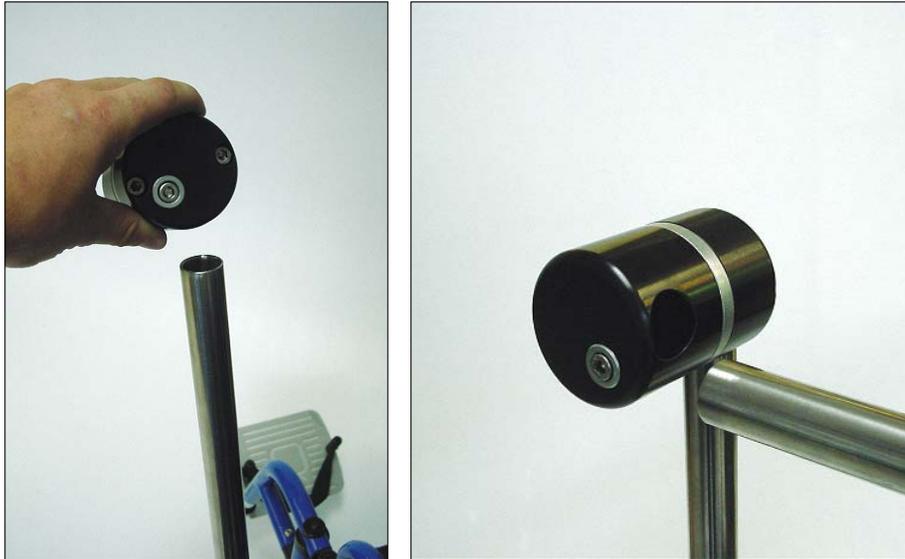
Slide the Side Tube and Horizontal Tube into the tube holes of the ELRH+RTHTM. Tighten the Pinch Clamps to hold the tubes in place.
